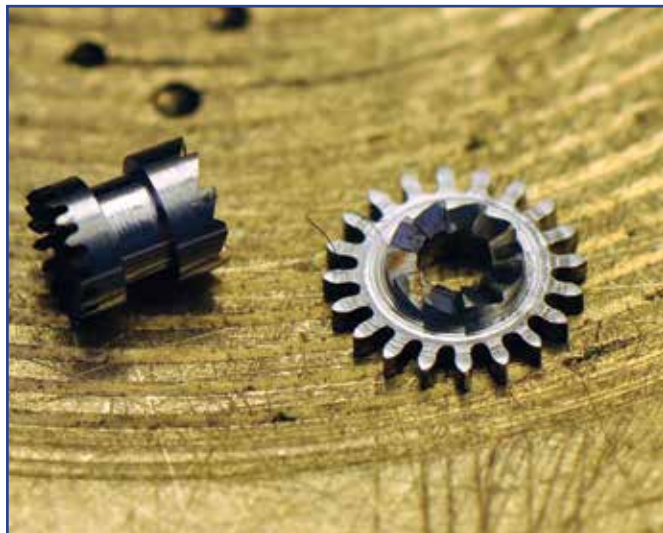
Prototype winding and sliding pinion ready for testing in the movement.
